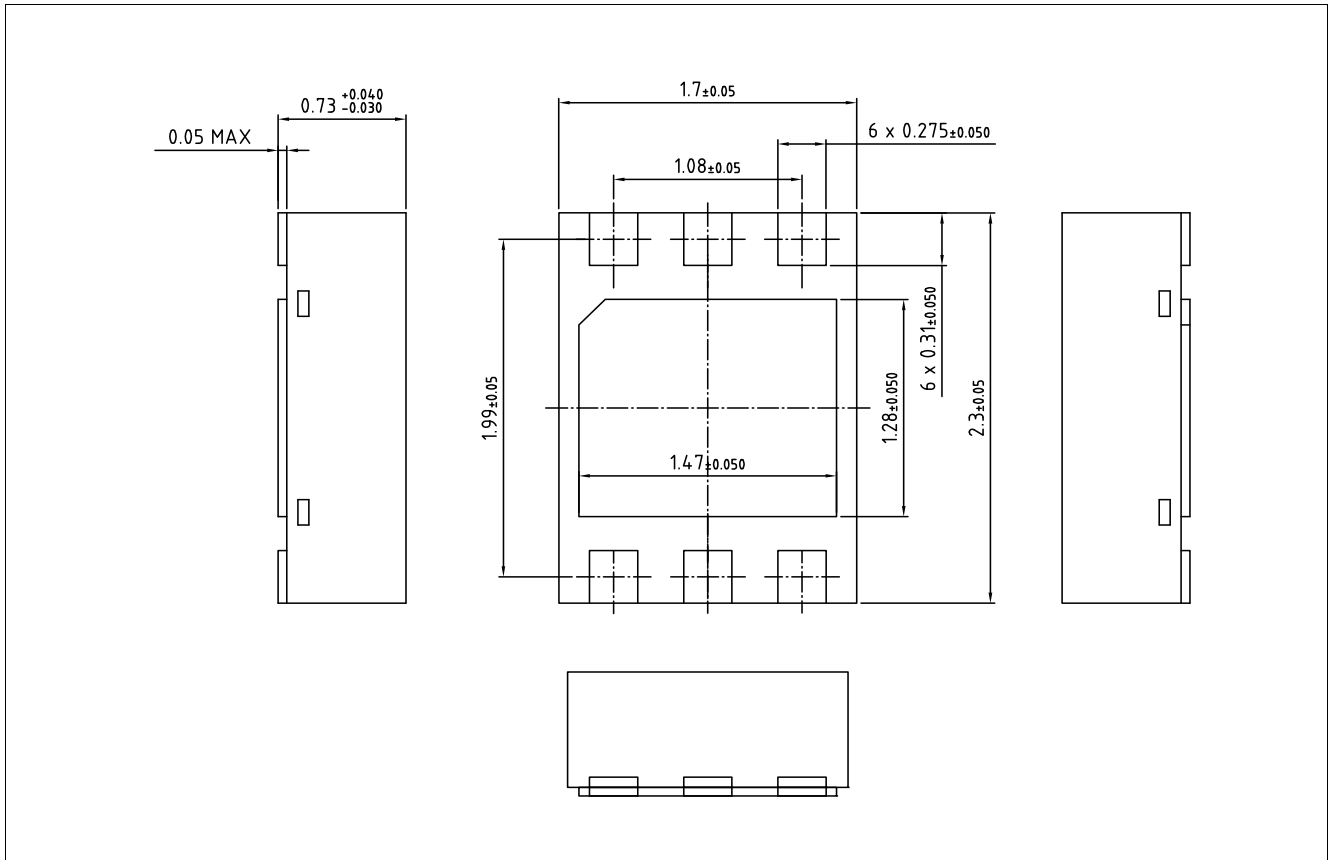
TSNP-7-10 Package Outline (bottom and side views)
